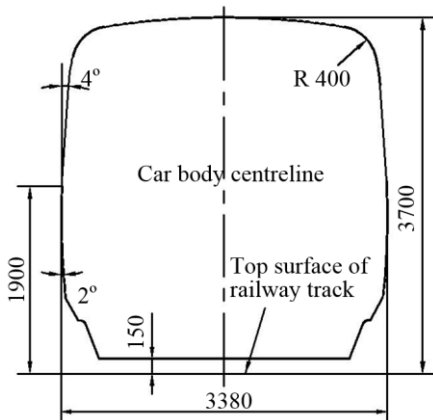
Cross-Section of the sightseeing car (unit:mm)
